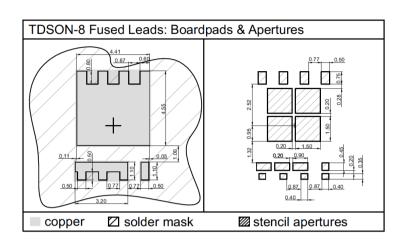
Footprint drawing PG-TDSON-8, dimensions in mm
